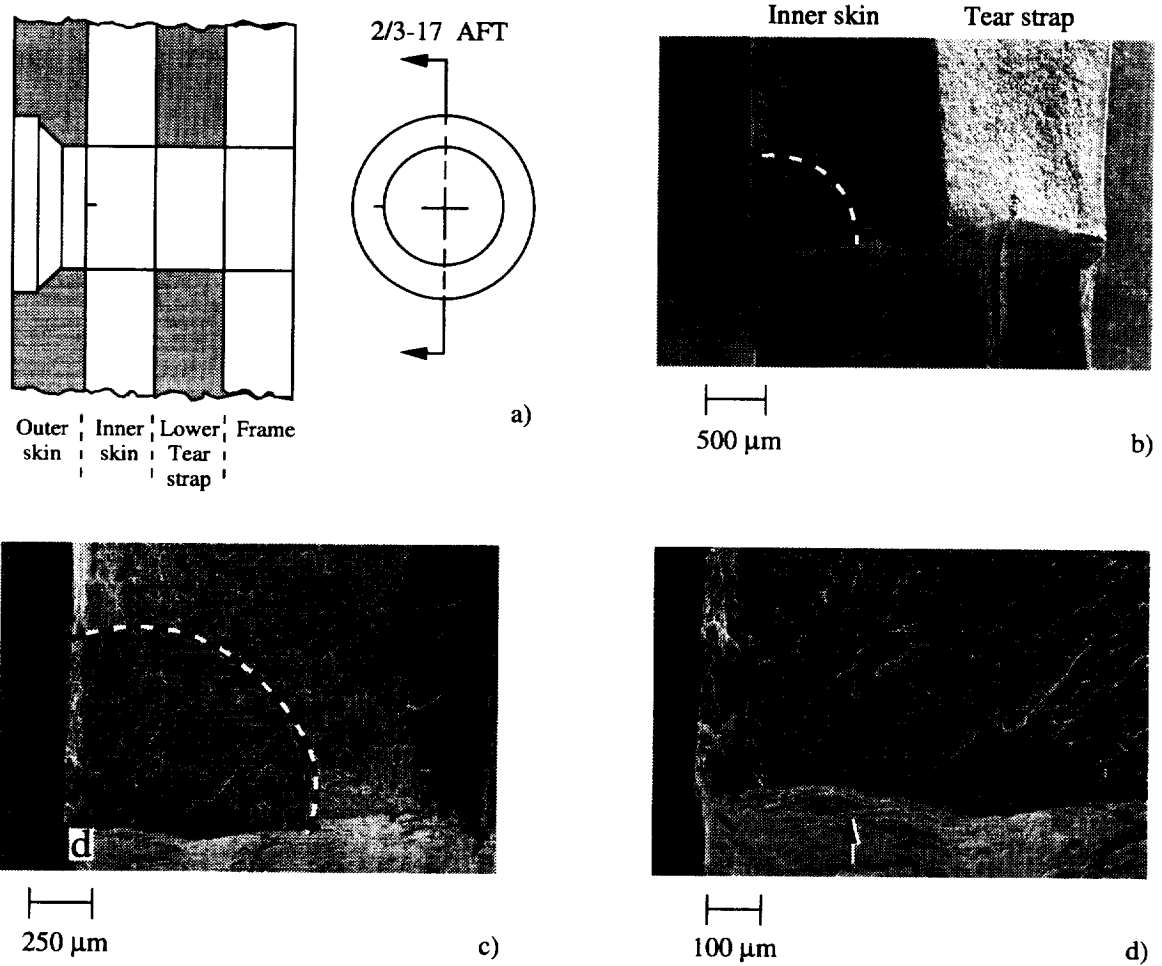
a) The schematic shows the rivet hole 2/3-17 configuration and the location of the inner skin corner fatigue crack oriented in the aft direction and at about the 9 o'clock position. b) The SEM micrograph shows the corner fatigue crack fracture surface located at the outboard corner of the inner skin rivet hole. The dashed line marks the fatigue crack front. The tear strap is located to the right of the inner skin. c) The SEM micrograph shows the inner skin corner crack at higher magnification. The dashed line marks the fatigue crack front. The bonded joint between the inner skin and tear strap is located on the far right of the micrograph. d) The SEM micrograph shows the crack initiation region "d" in Figure 8.30.c. An arrow marks the likely site of crack initiation.
